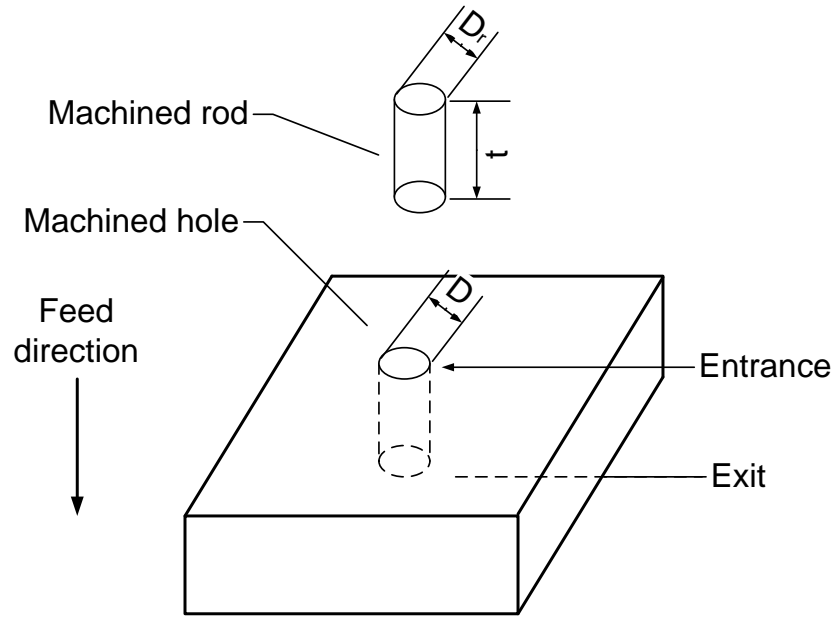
Illustration of the hole and rod machined by rotary ultrasonic machining.
